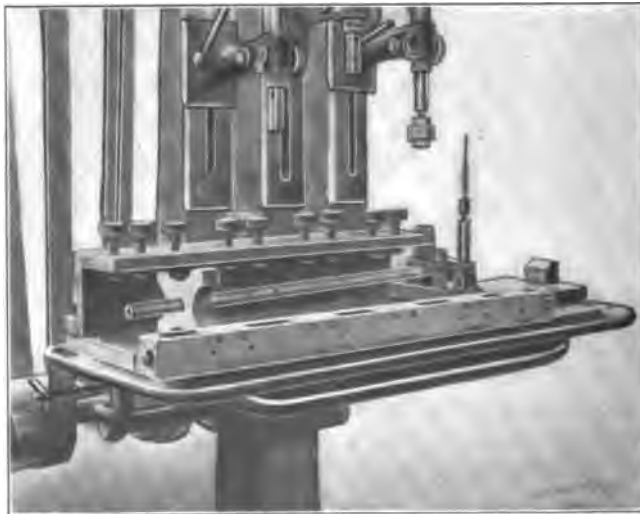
Fixtures for Drilling and Reaming Cam-shafts
